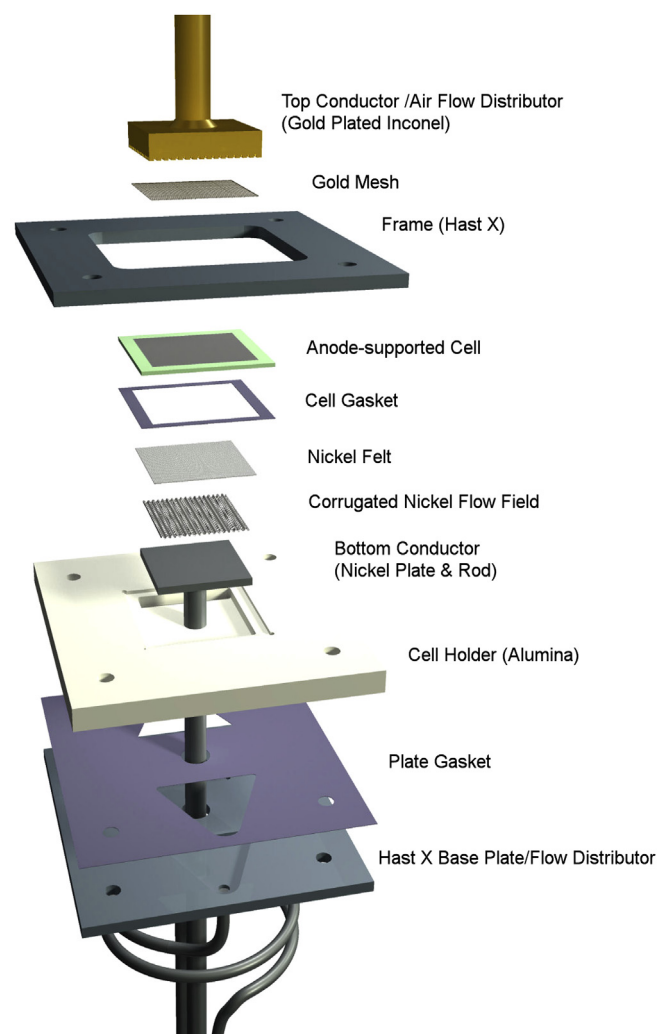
Exploded view of the cell fixture used for testing MSRI, St. Gobain, and SOFCPower SOCs.
